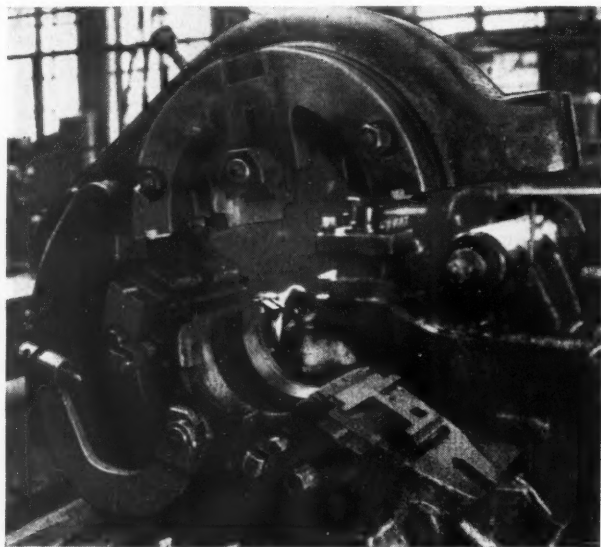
This driver makes it possible to machine journals on car axles without removing the wheel from the axles.
